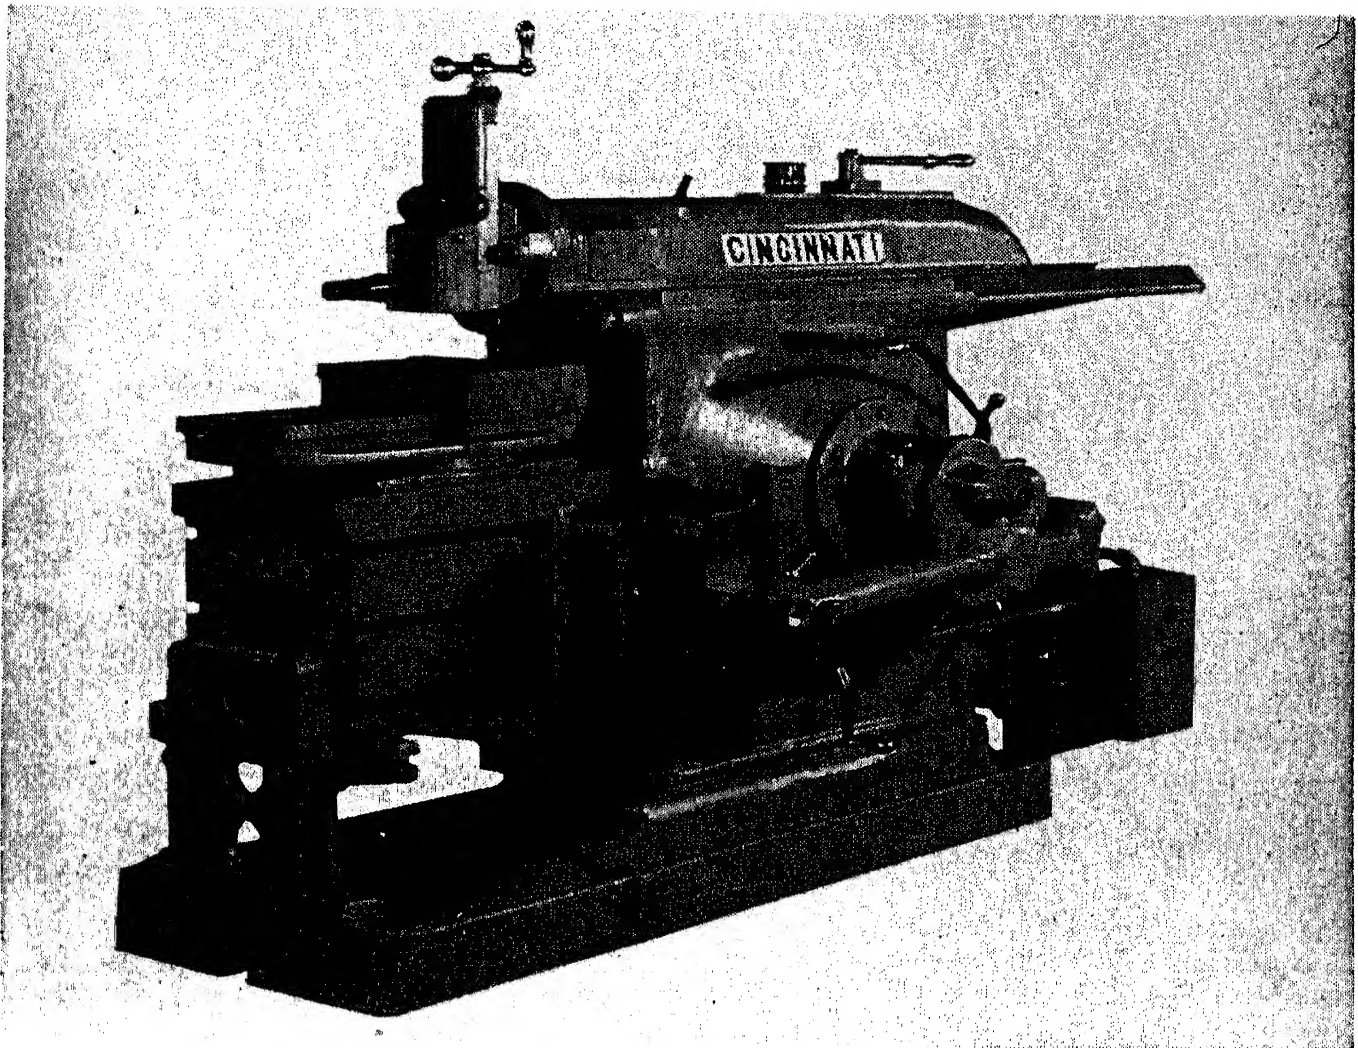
A 24 in. standard horizontal crank operated push cut shaper.
